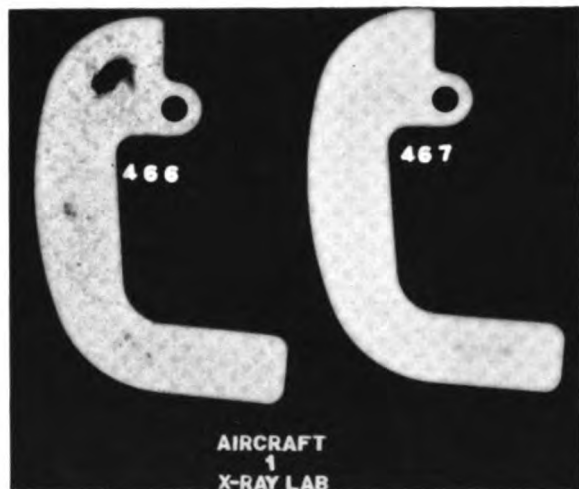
Left, Excessive Porosity in Aluminum Die-Casting; and, Right, Sound Casting of the Same Material.
